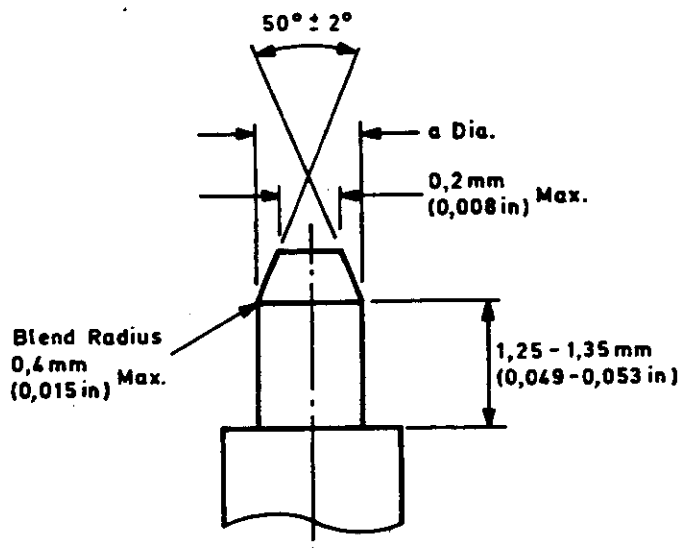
Gauge pin for centre contact of socket connector (for dimension 'a' see below)
